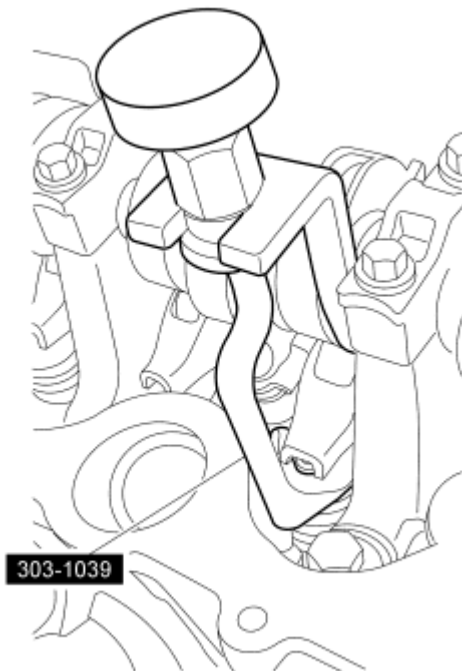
Locating LH Cylinder Head Camshaft Roller Followers And Bolts
